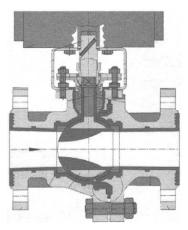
A lined body ball control valve Courtesy of Richter Chemie-Technik GmbH
